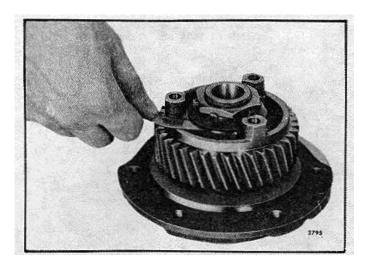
Checking Clearance Between Blower Drive Gear Support Thrust Washer and Blower Drive Gear Thrust Bearing
